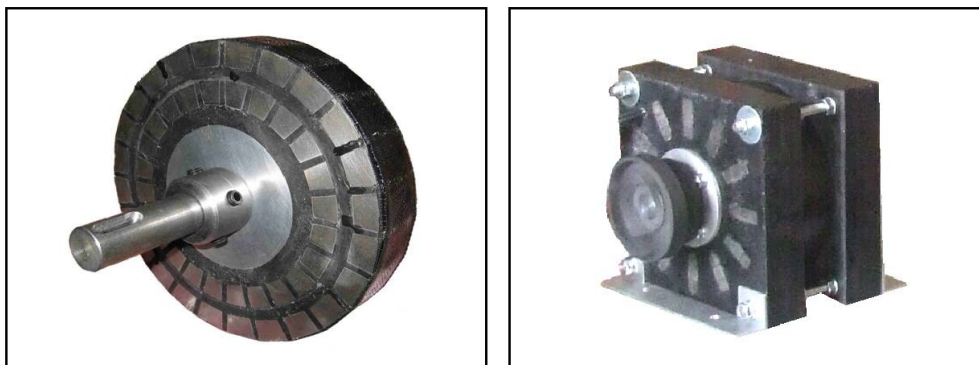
Left: side view of the first rotor, the shaft already mounted. The single poles arranged in two rings can be seen well. Right: side view of the first machine, completely arranged with half-coupling.
